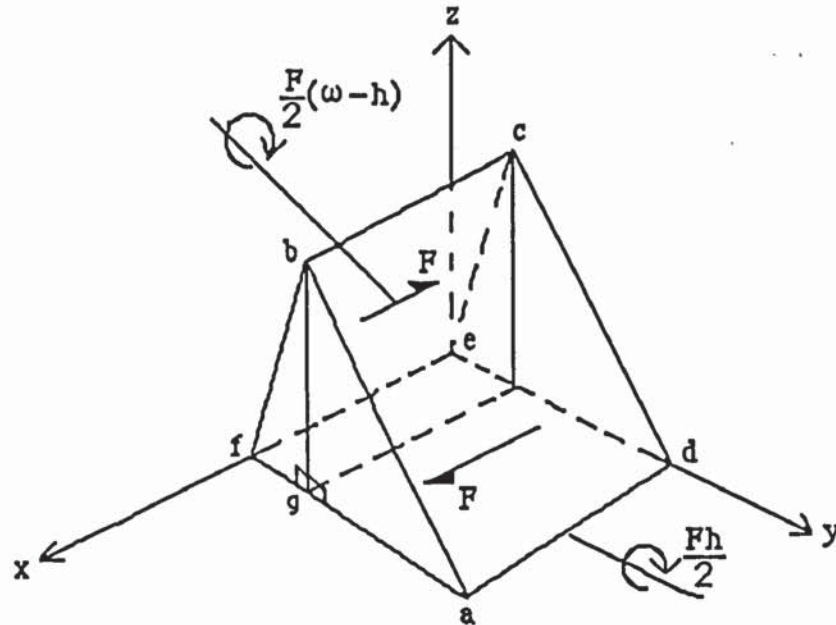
Moment $Fh/2$ acting parallel to weld y - axis.
